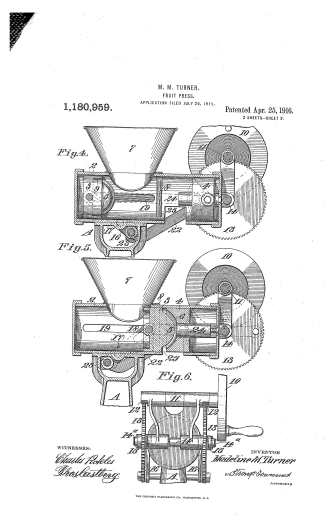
Patent drawing of US1180959A – Fruit Press (1916), M. M. Turner
